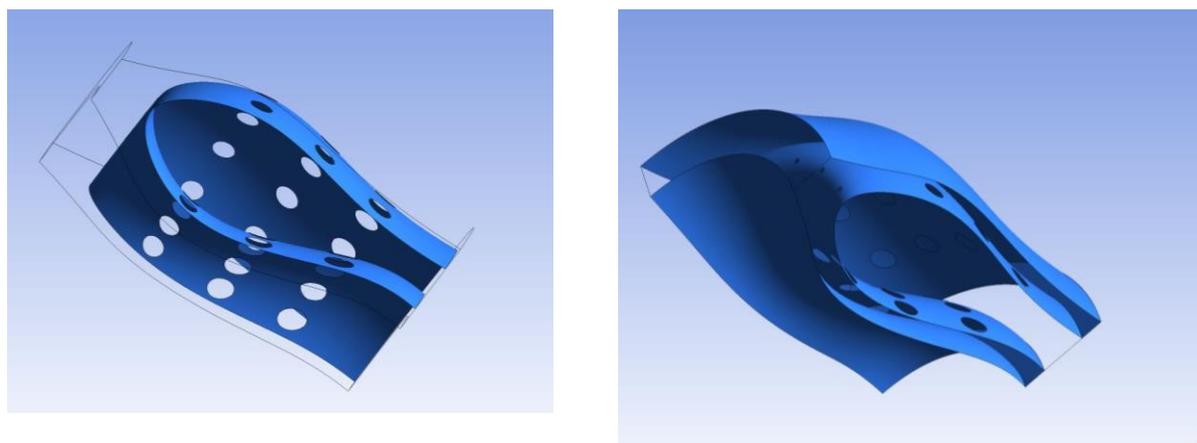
The external hole distributions, quarter view (a) and 3D view (b)
